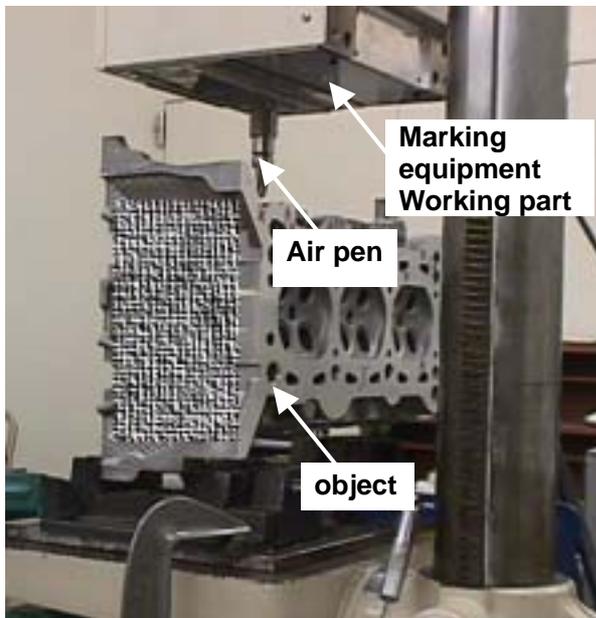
Marking test equipment Figure 3-3: Stylus head form and dot appearance
